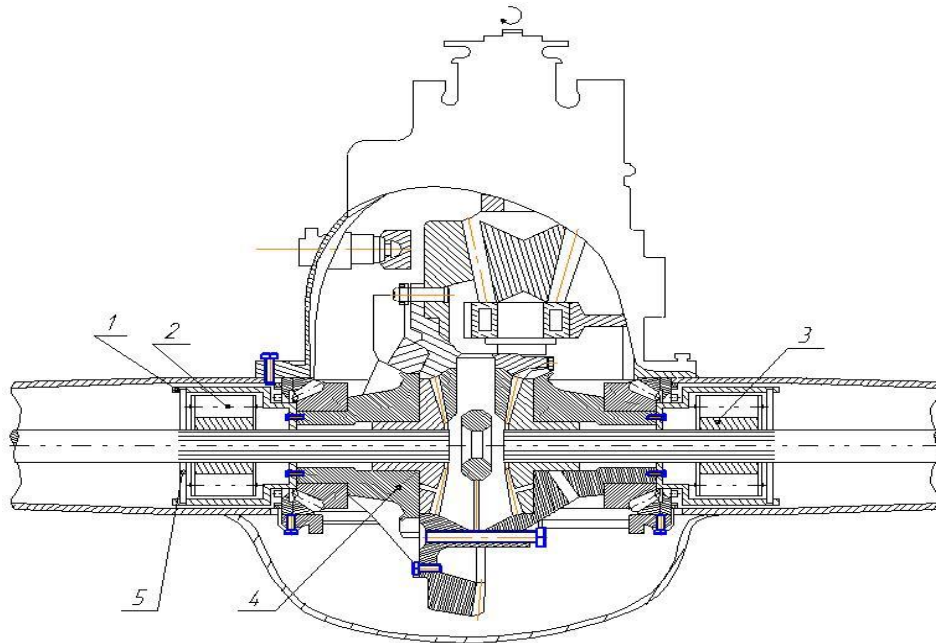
Schematic diagram of the differential lock:1 – outer ring; 2 – cage with rollers and springs; 3 – sprocket; 4 – differential housing;5 – lock washer
